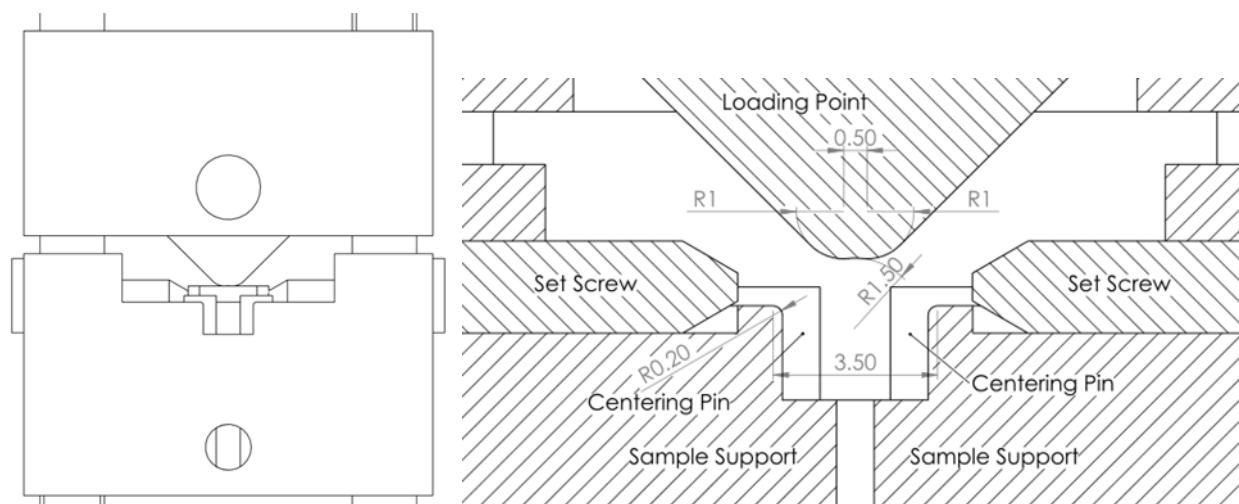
Schematic of the four-point bend loading fixture. Left: front view including bend sample, right: cross sectional view excluding the bend sample, showing dimensions in mm.
